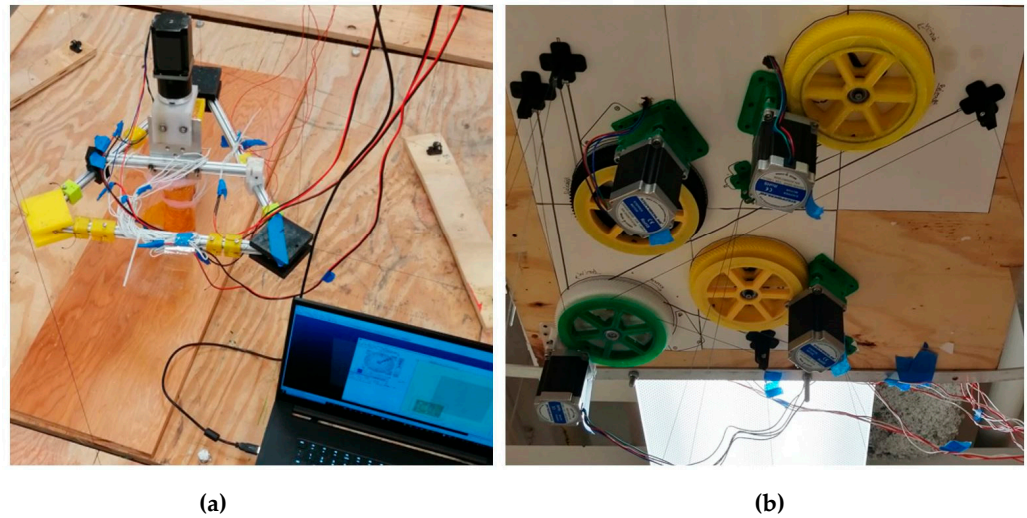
Hybrid printer assembly. (a) end effector (FPF/FGF extruder) and the printing bed with A, B, and C anchors, (b) ceiling unit with gears, motors, and line rollers.
